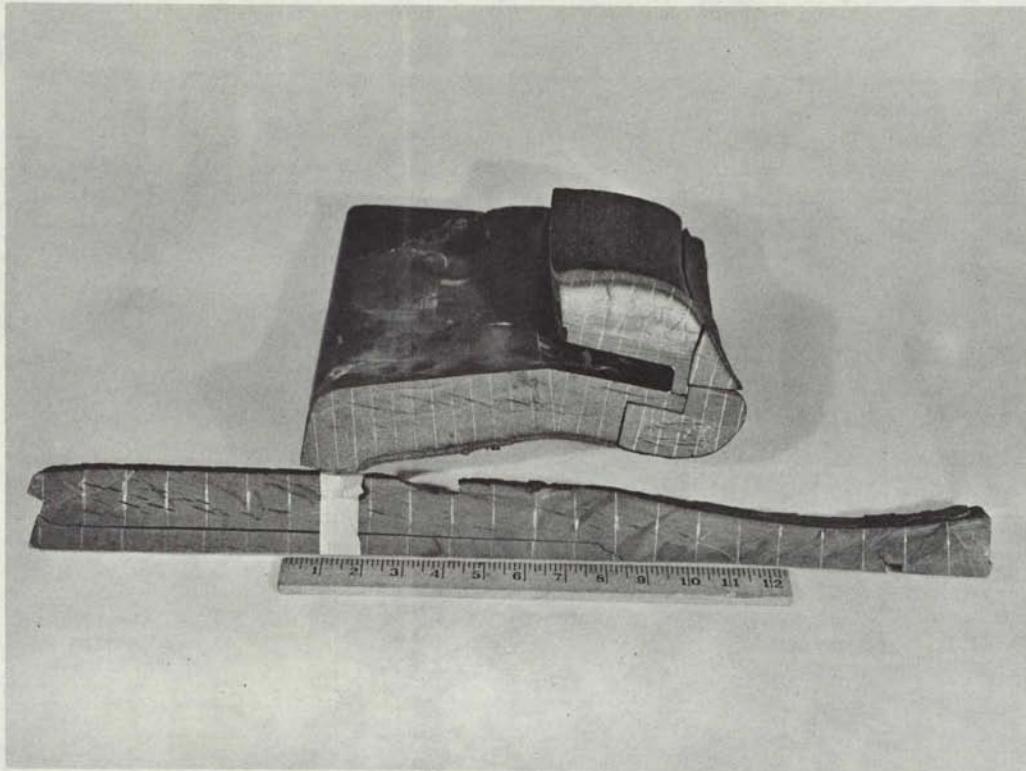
Sectioned Nozzle No. 6 Submerged and Exit Cone Liners
